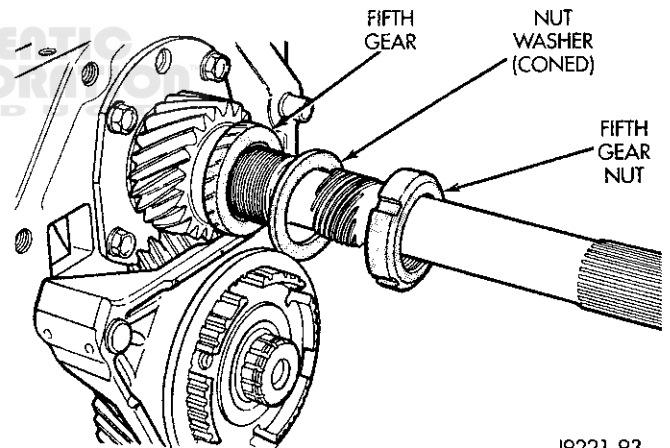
Mainshaft Fifth Gear Nut And Washer Removal
